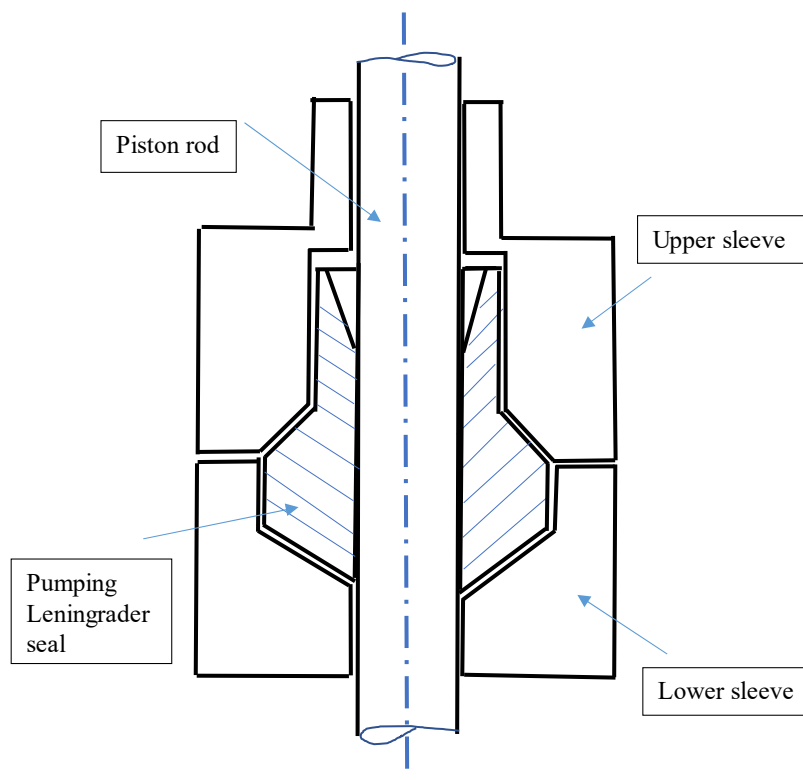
Schematic of the piston rod assembly (dimensions not to scale)
